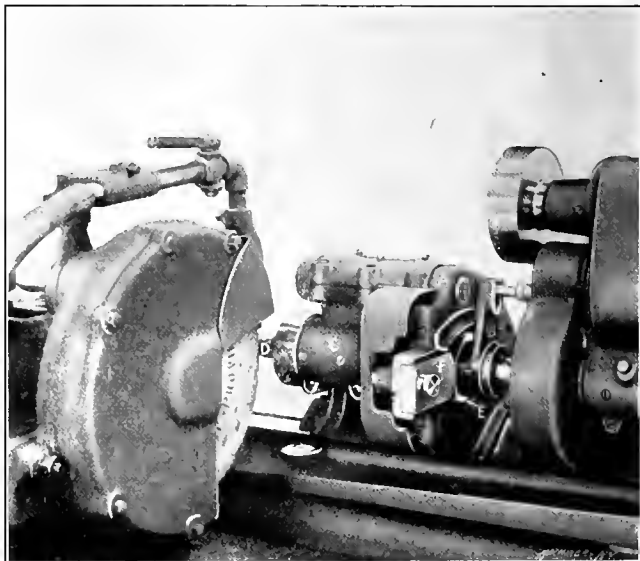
Rear View of Cam Grinding Attachment, showing Construction
